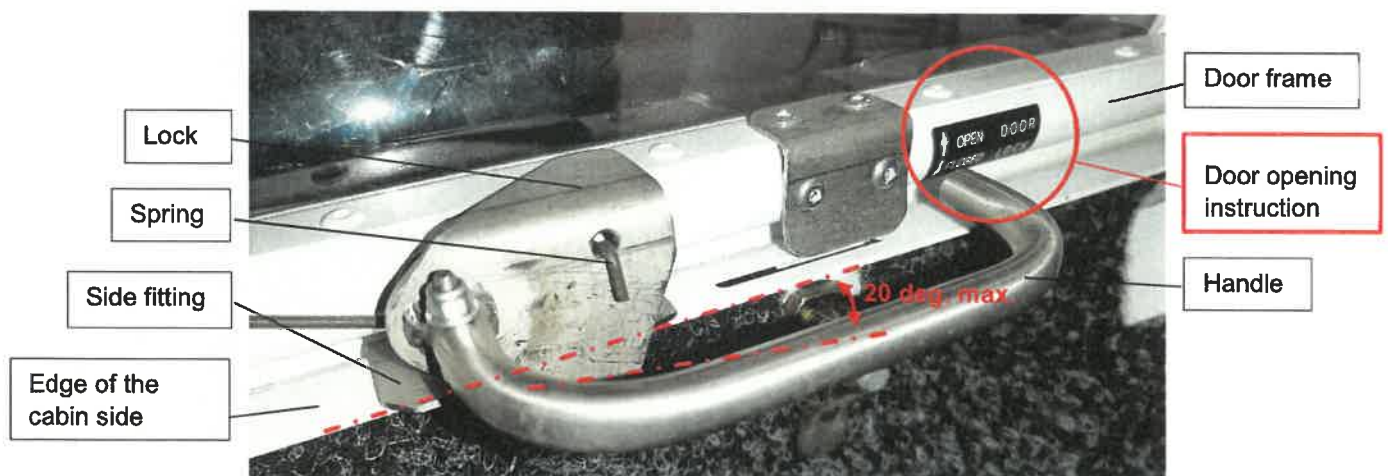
Door locking mechanism (left door) with handle in closed setting. Also shown the range of engagement of locking mechanism [source: SCAA]
